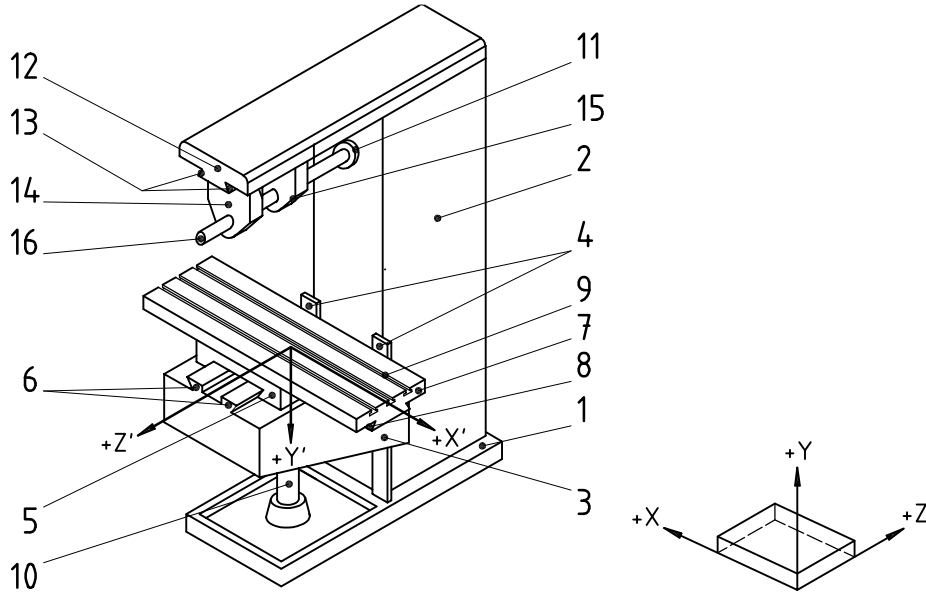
Milling machine with table of variable height, with fixed horizontal spindle
